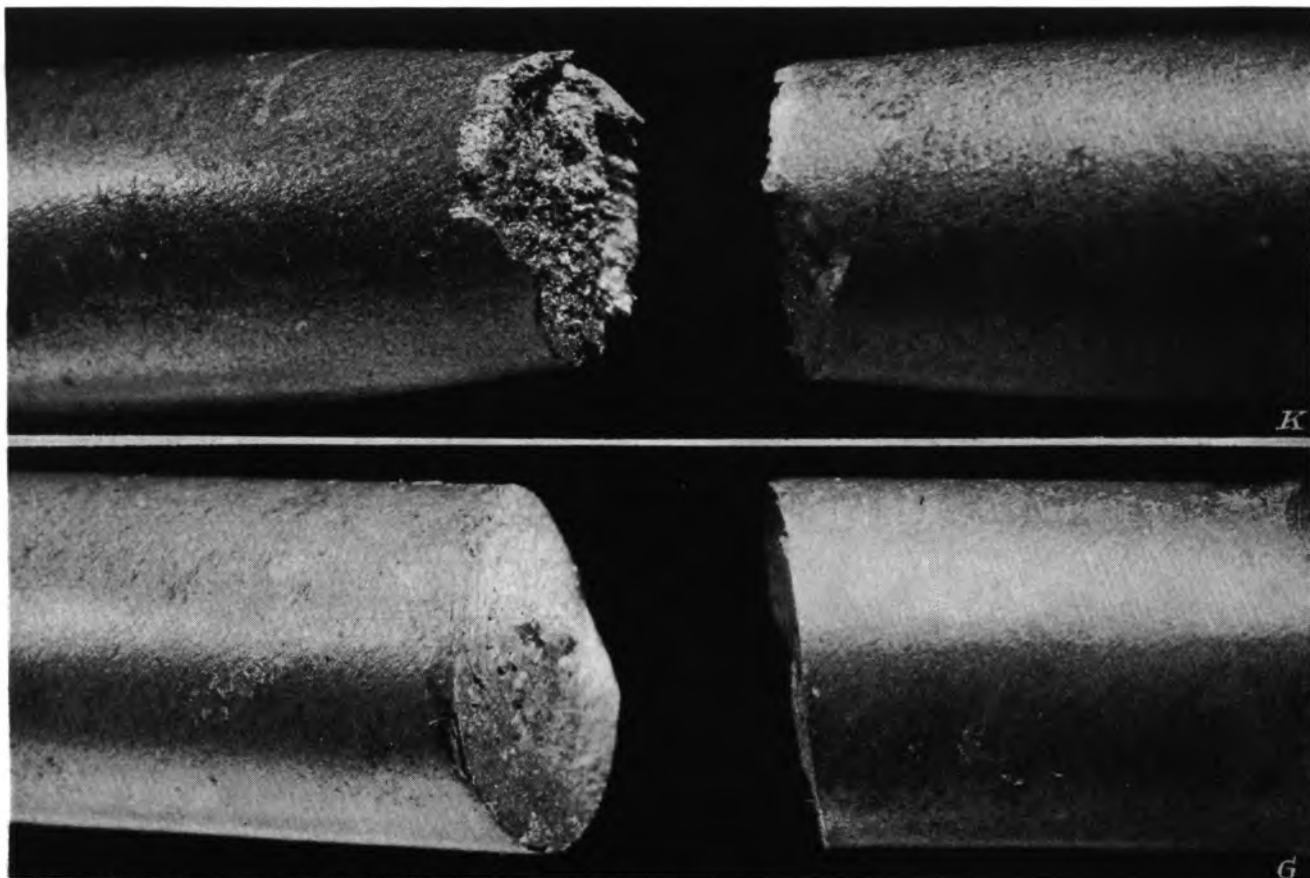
TYPES OF FRACTURE SURFACES
